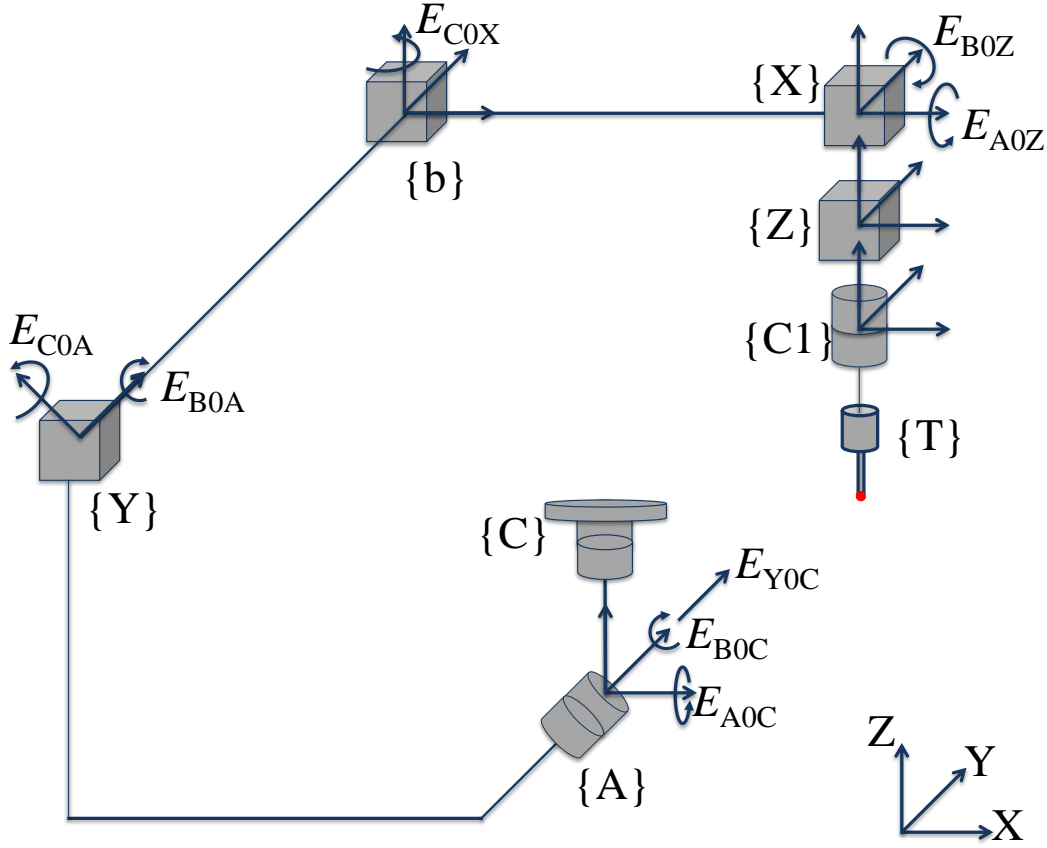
Kinematic model of the wCAYbXZ(C1)t machine tool with inter-axis errors
